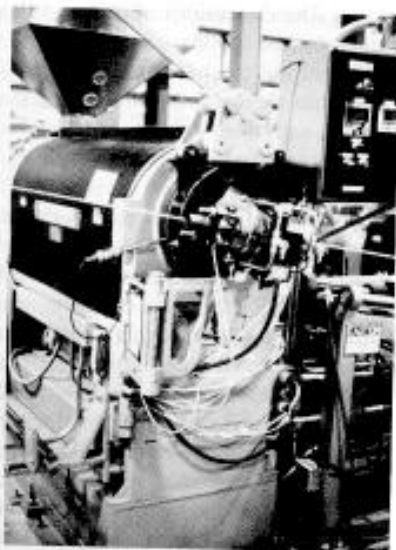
Wire line and crosshead die. (Courtesy Davis-Standard)
